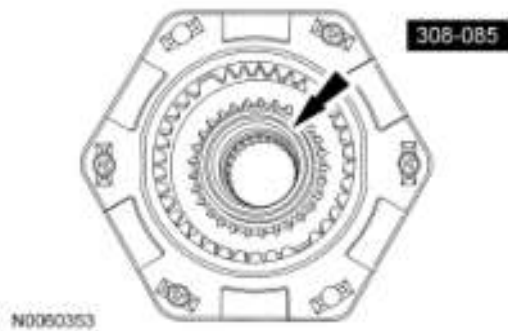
Installing Bushing & Bearing Using A Suitable Press & Special Tool (308-085)
